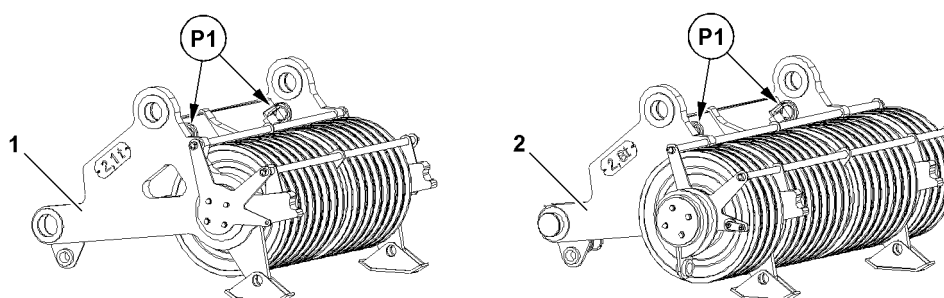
Fastening points on roller set 400 t and roller set 600 t
